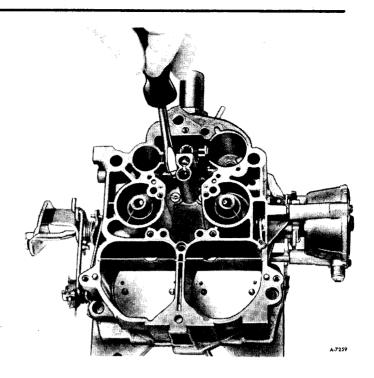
Removing Pump Discharge Ball Retainer and Check Ball
